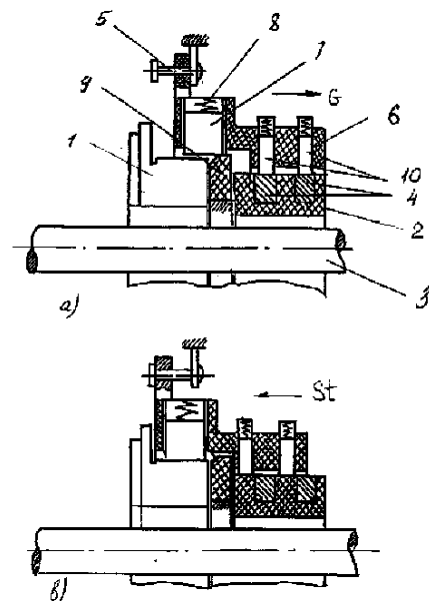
Scheme of collector-brush assembly: 1- Collector; 2- contact ring clutch; 3- shaft; 4- contact rings; 5- switch; 6- brush clutch; 7- brush; 8 – spring; 9 – bearing; 10 – brush
